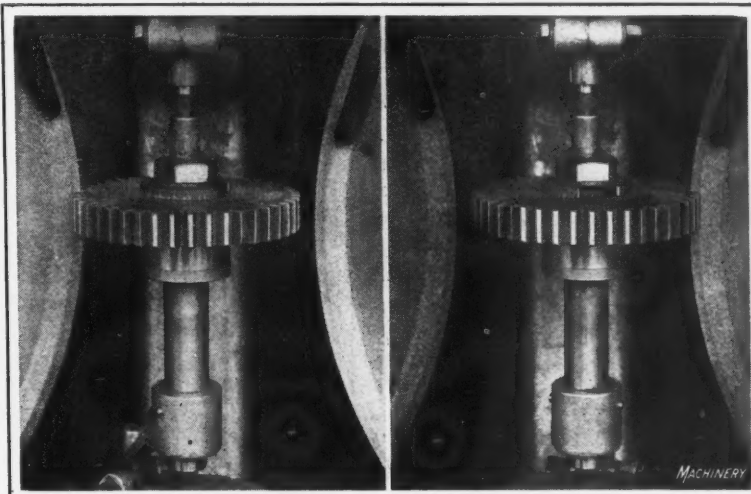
Views showing how the Gear is alternately brought into Contact with the Two Grinding Wheels
